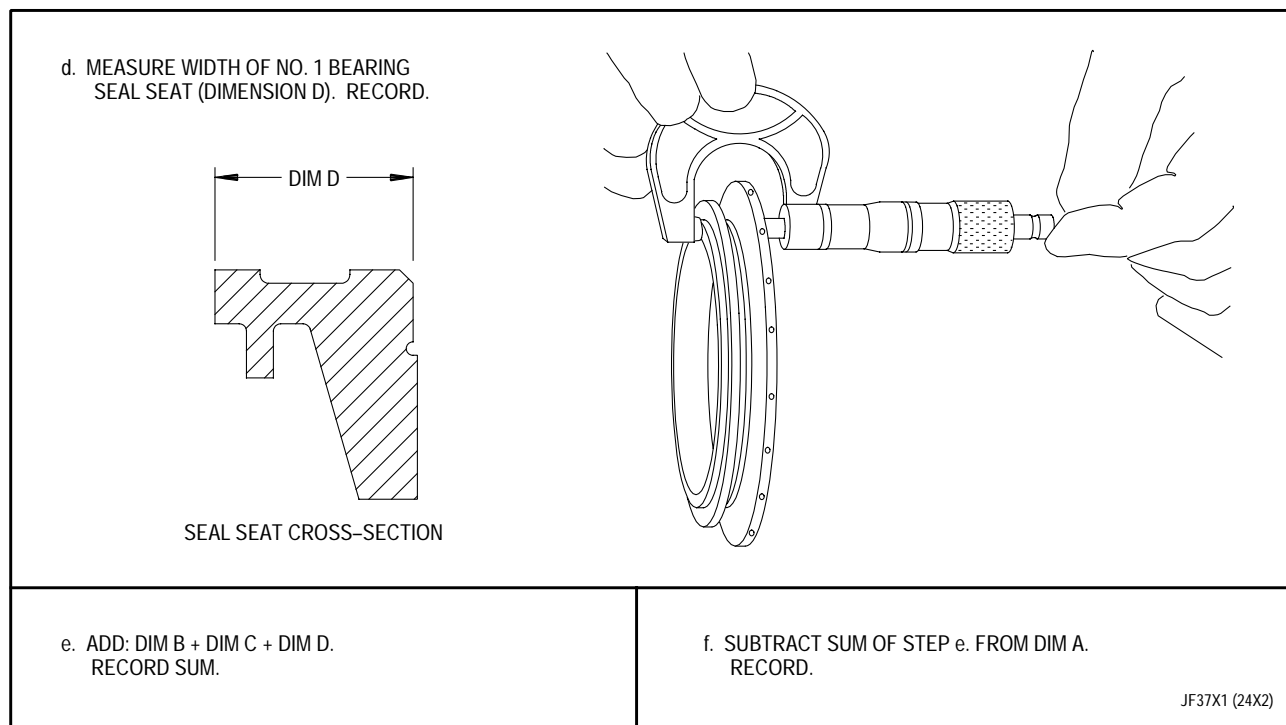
No. 1 Bearing Position Measurement Check - Summary of Operations (Sheet 2 of 2)
